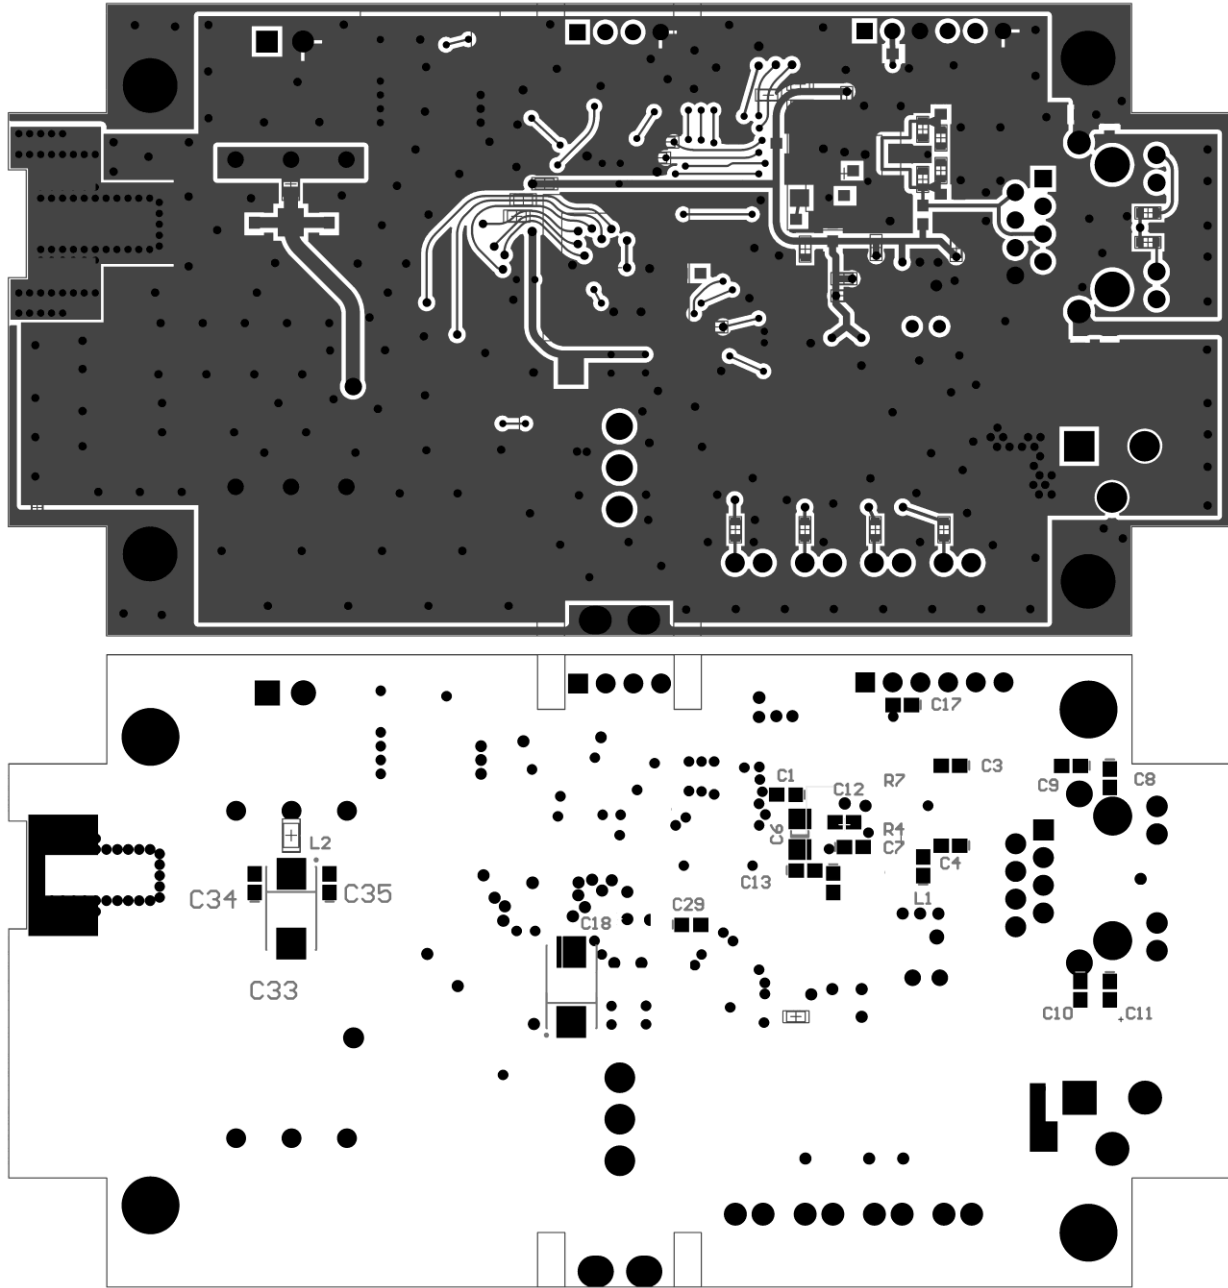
The Base PCB layout (copper and silk screen with pads, bottom layer).
